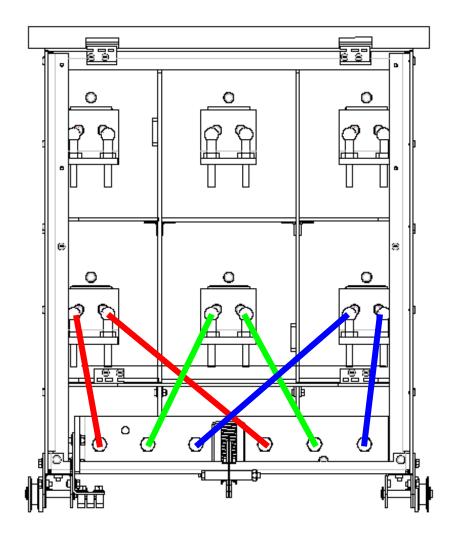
Typical mounting of a Single Cable Ground Set. Special cables are required for this type of connection (500 kcmil). The connection shown in this figure is for a bottom terminal connection. The same connection method should be used for a top connected system.
